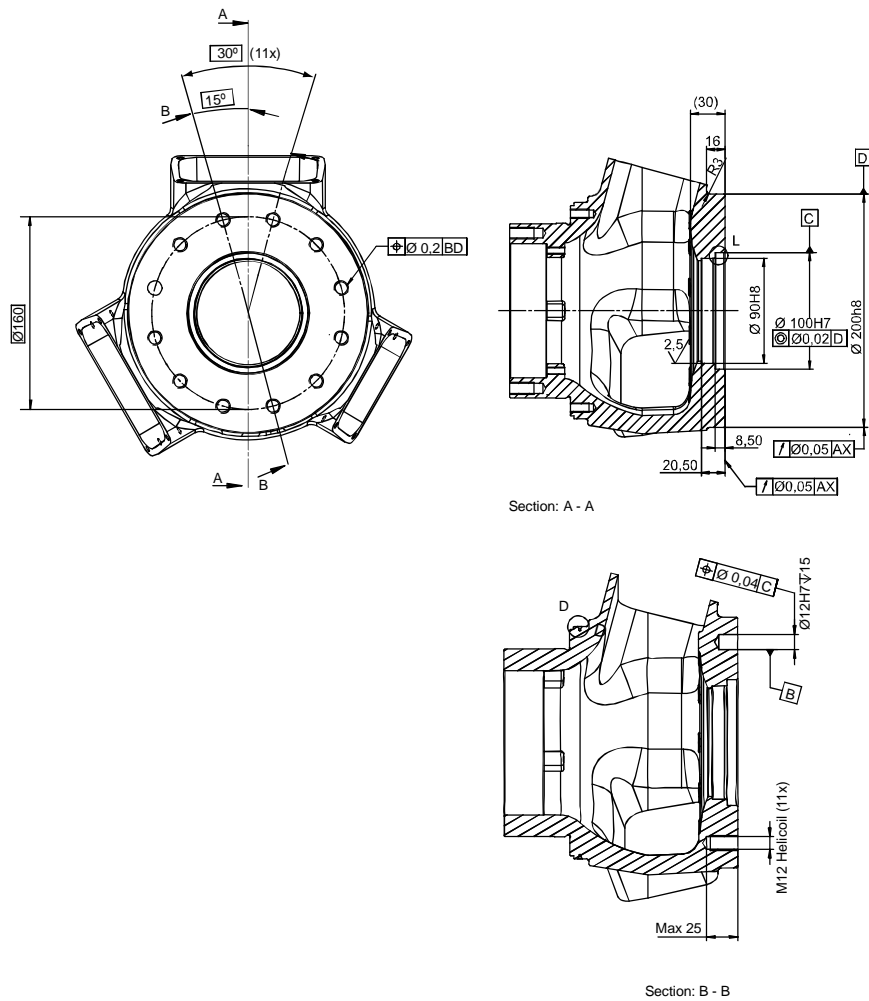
Robot tool flange SS-EN ISO 9409-1:2004 (dimensions in mm).
